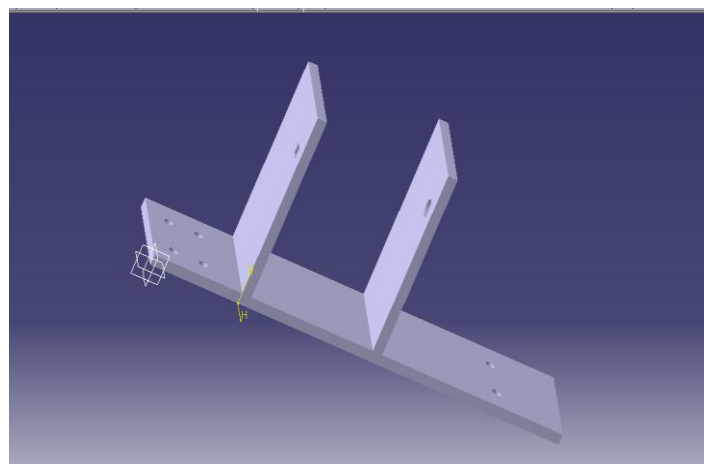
Torsion Test Jig Used In Universal Testing Machine
